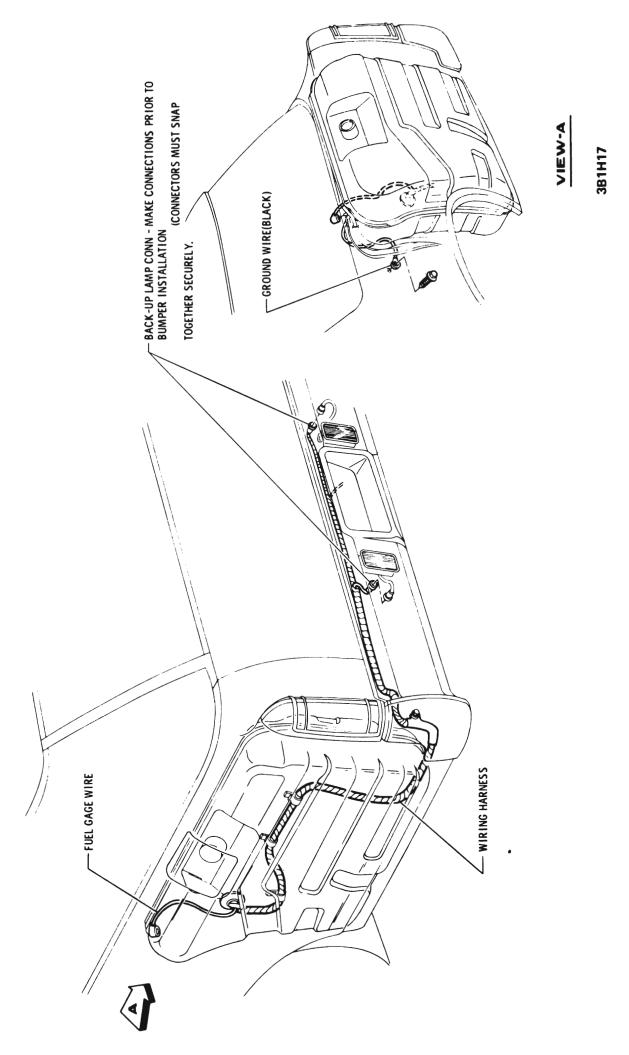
H-17 Backup Lights and Fuel Gauge Wiring "B" Wagon
